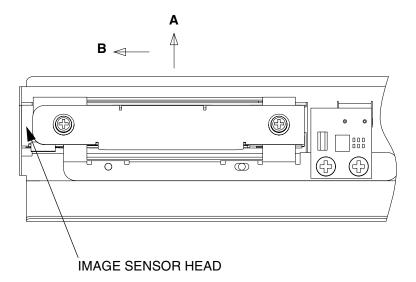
Removal of the H.POS. Sensor (Image Sensor Head) :For Front Engine
